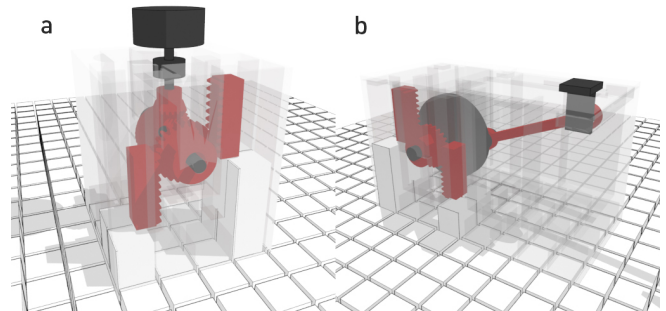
a) Inside view of *Rotator's* mechanical system. Two linear gears are driven by the pins which translates into rotation using a gear train b) Gears and a lever create horizontal movement in the *Slider* block.
